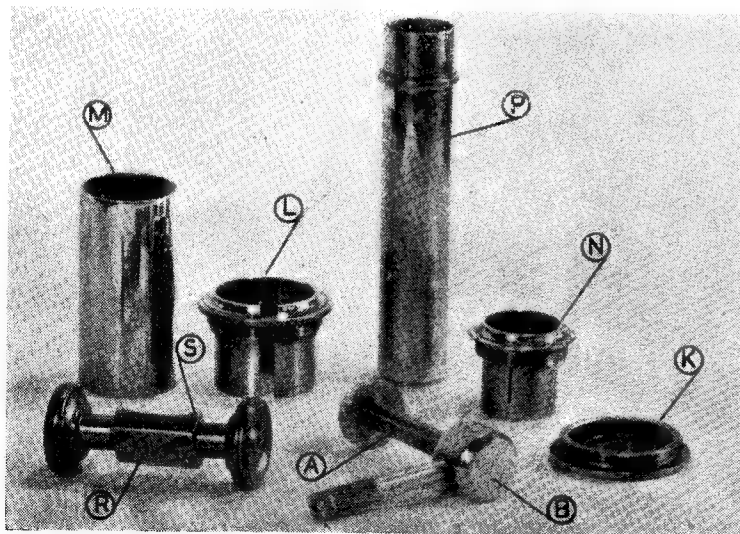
Some of the microscope parts.—(A) locking bolt, (B) locking lever, (L) top tube sleeve, (M) racking drawtube, (N) drawtube sleeve, (P) drawtube, (R) bearing cap, (S) bearing plate
